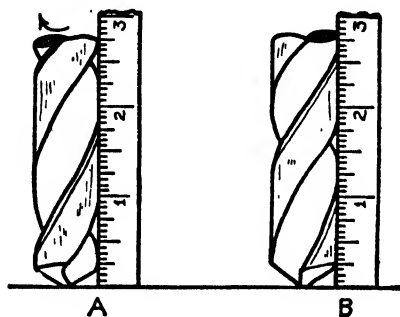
Lip clearance at the outer edge may also be judged by standing a drill beside a rule and rotating it. The heel of the cutting end (B) should register higher on the rule than the front cutting edge (A).
